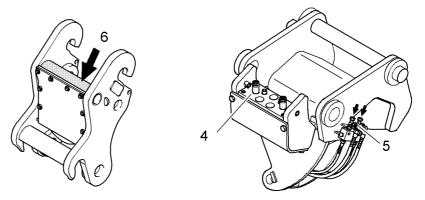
LIKUFIX work tool on quick-change adapter without LIKUFIX
